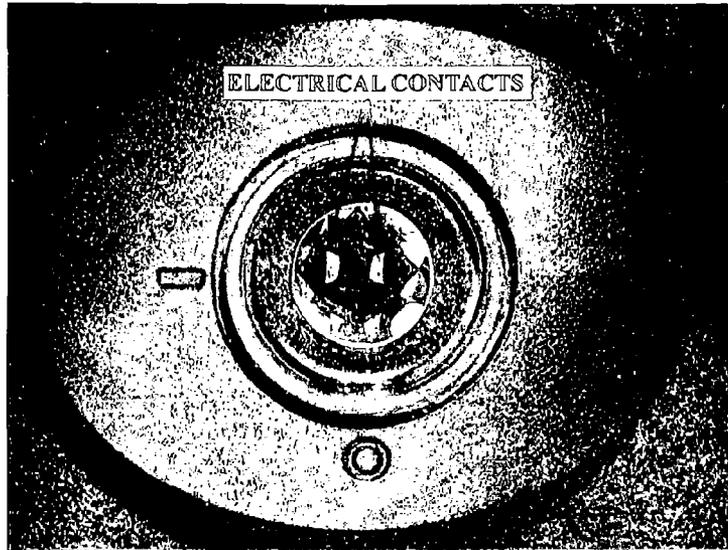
An image of the electrical contacts plainly visible after removal of the locking cylinder from the key-switch lock body.
